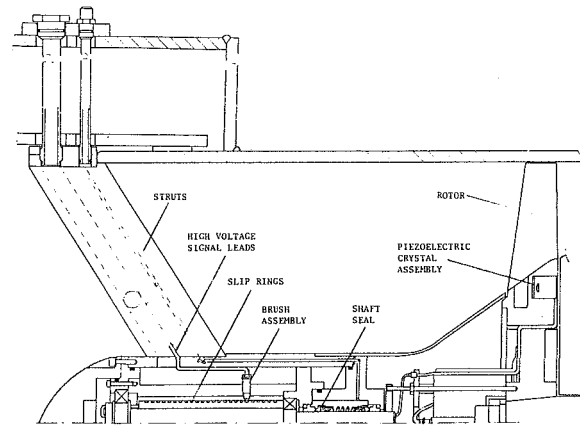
Cut away view of the rotor, shaft and forward centerbody.
